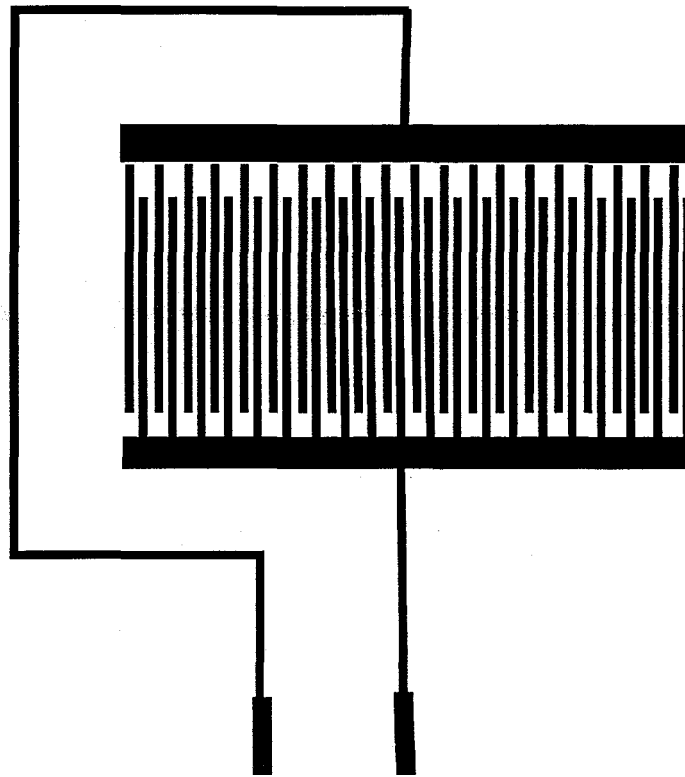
Comb Pattern for Measuring Insulation Resistance of Printed Circuit Boards
